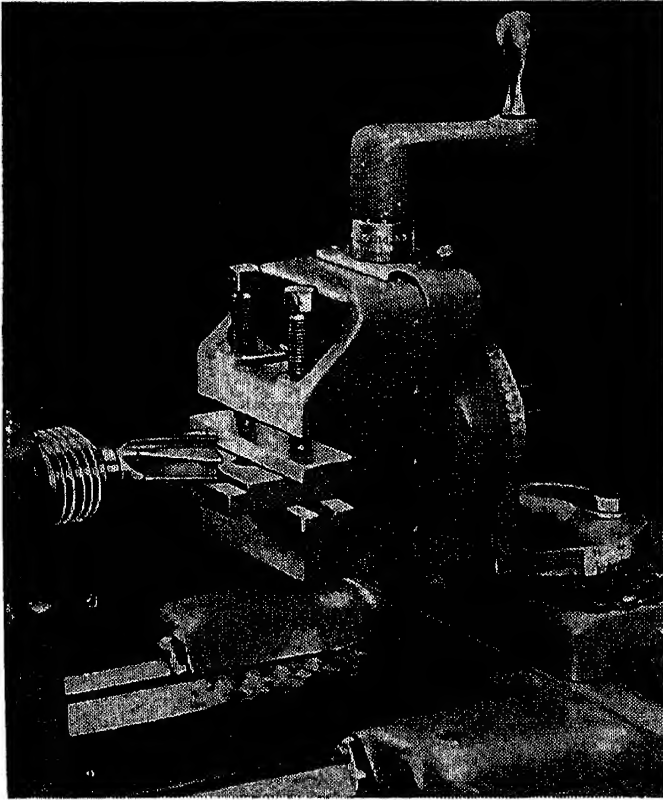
A milling attachment on a lathe. (Courtesy South Bend Lathe Works.)
